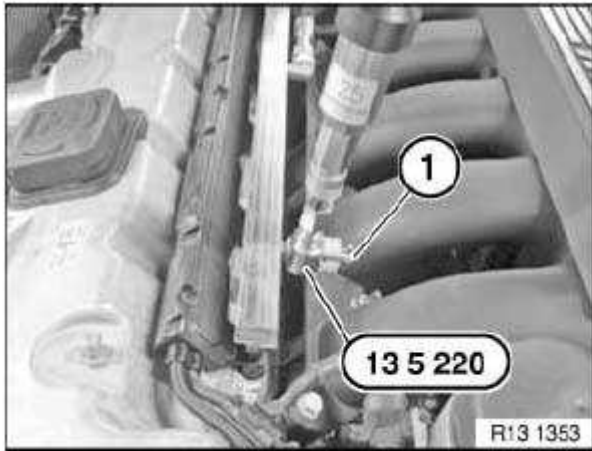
Check Valve And Special Tool Kit 13 5 220
